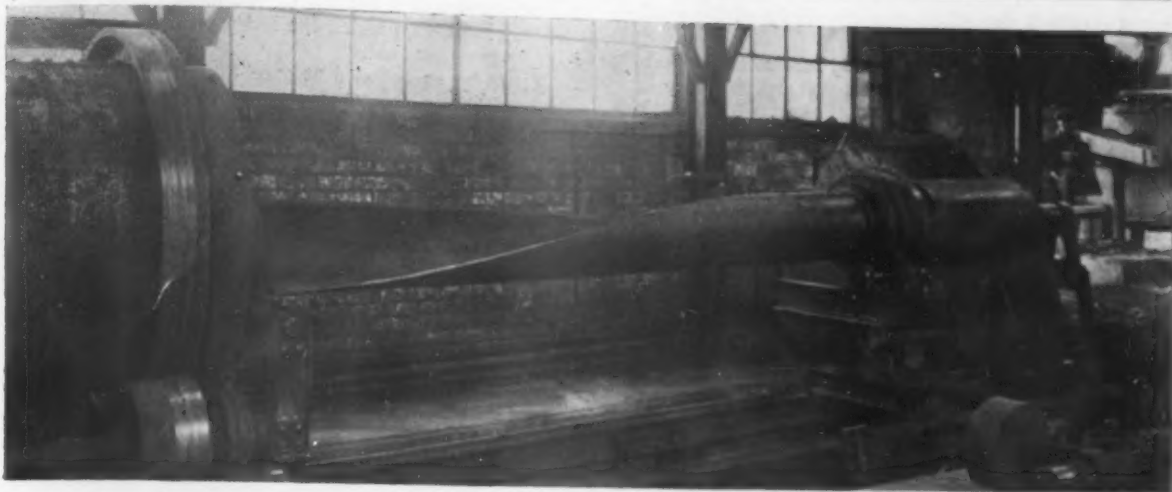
The Pourer Arrangement and a Portion of the Mold of the Experimental Machine Used in Making the Large Pipe in Fig. 1
